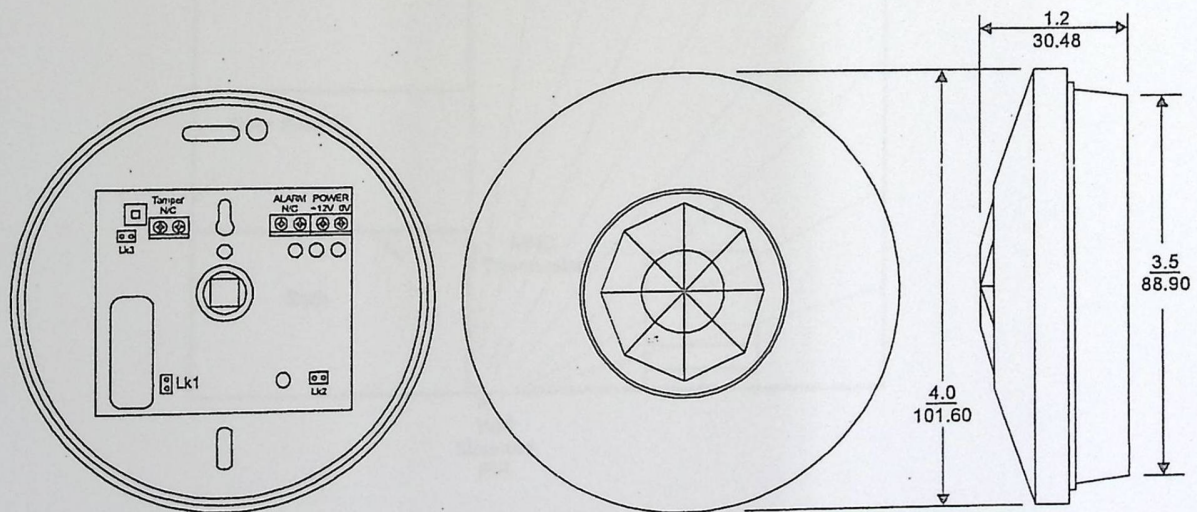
MRC19-PIRC Wiring Connections and Dimensions, in. (mm)
